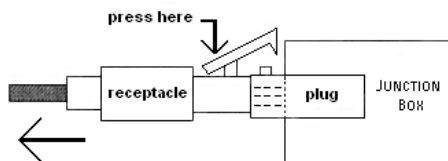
Side view of receptacle-plug removal from the Power Supply Assembly.
